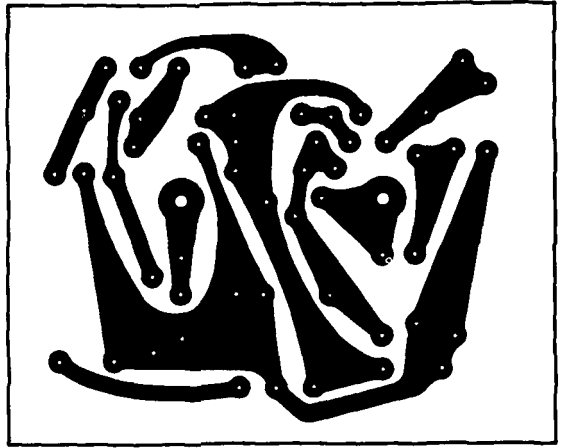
Printed circuit for the 5-MA S-meter. Component layout is shown in fig. 7.
